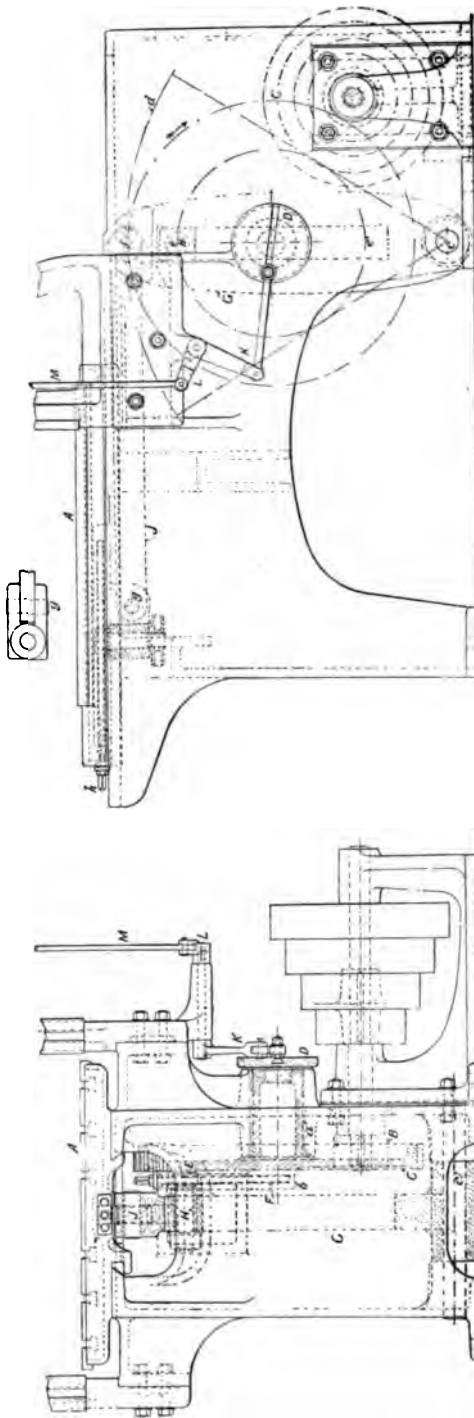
Crank Planing Machine. (Greenwood & Batley, Ltd.)
